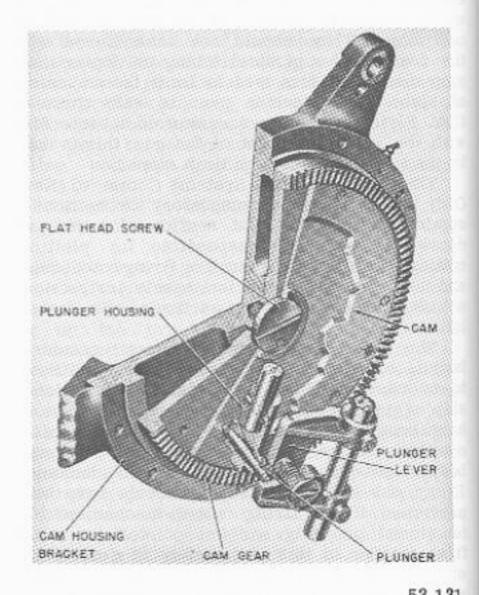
Cutaway view of firing cutout mechanism plunger and cam.
